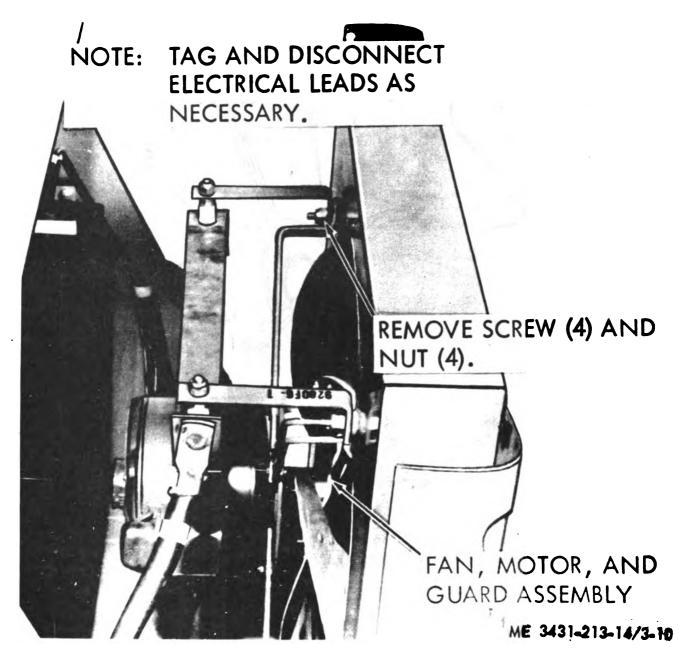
Fan, motor, and guard assembly, removal and installation.
